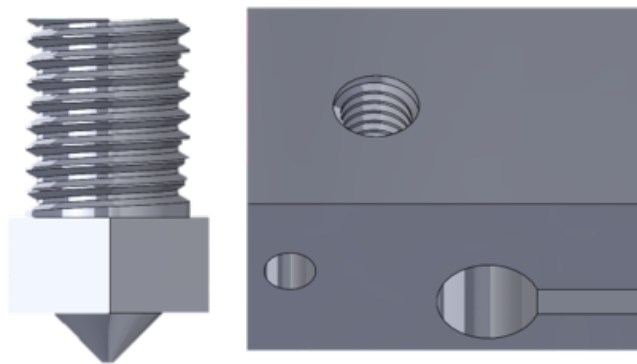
CAD representation of the extruder nozzle (Left) and heat block (Right) of the extruder assembly.
